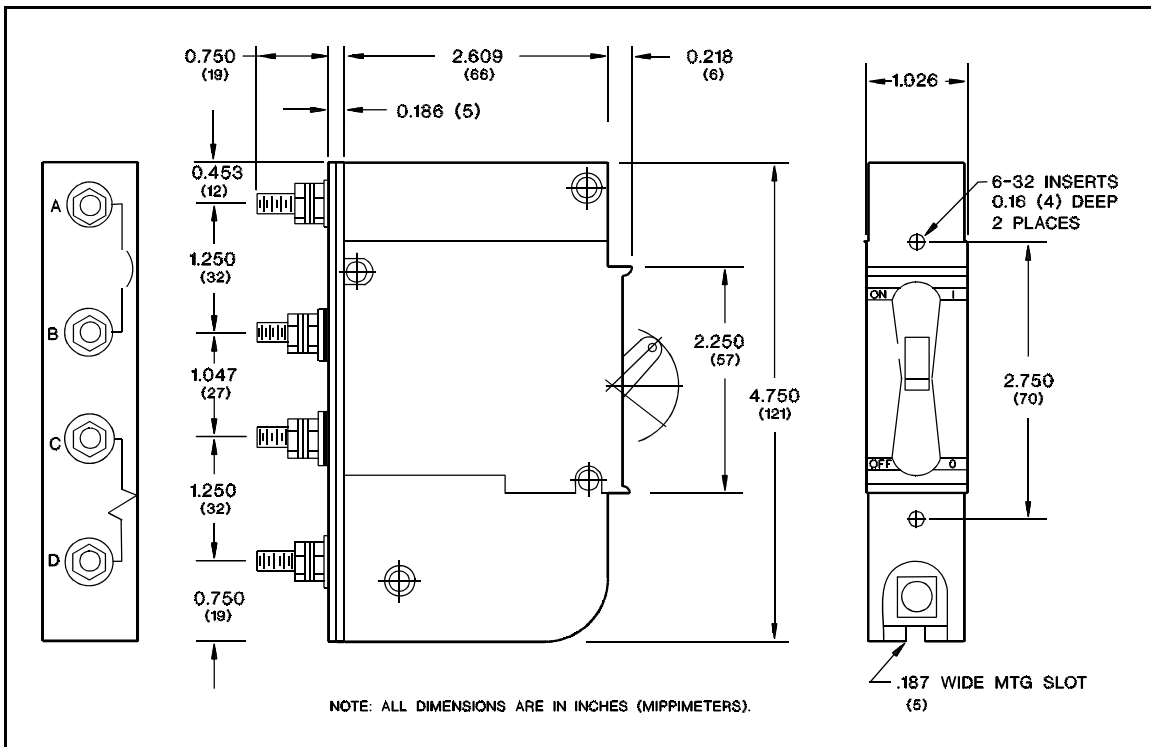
Single-Pole Circuit Breaker Outline Drawing.
